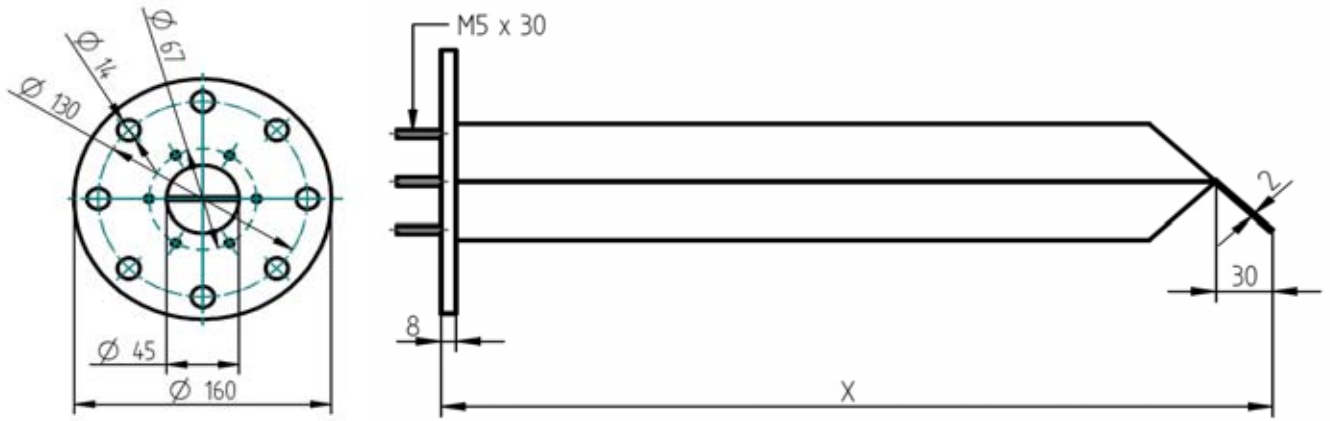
Dimension drawing type 656R1014 ... 656R1023
